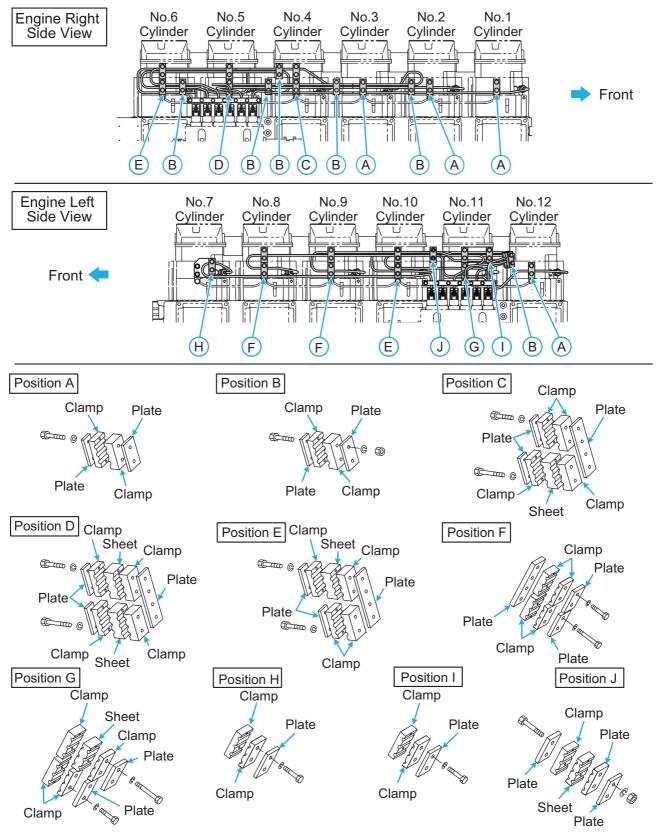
High Pressure Fuel Injection Pipe Clamp - Location
